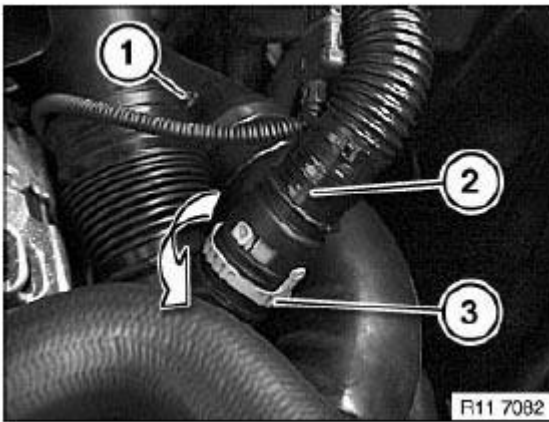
Identifying Hose Clip, Air Hose And Quick-Connect Fastener
